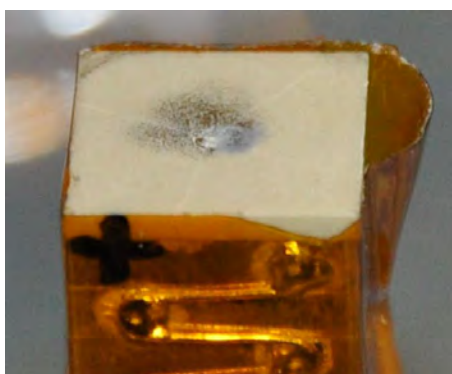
Fracture damage to the end plate of the piezo as a result of excessive shear forces.
